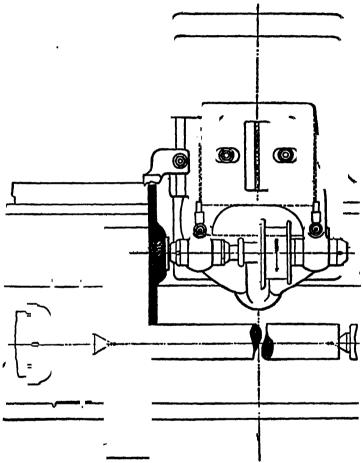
FACE GRINDING ON A UNIVERSAL MACHINE
